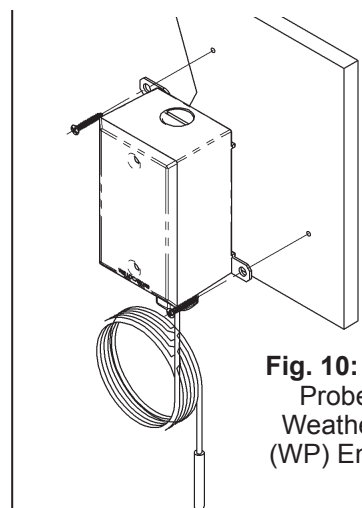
Remote Probe with Weatherproof (WP) Enclosure
